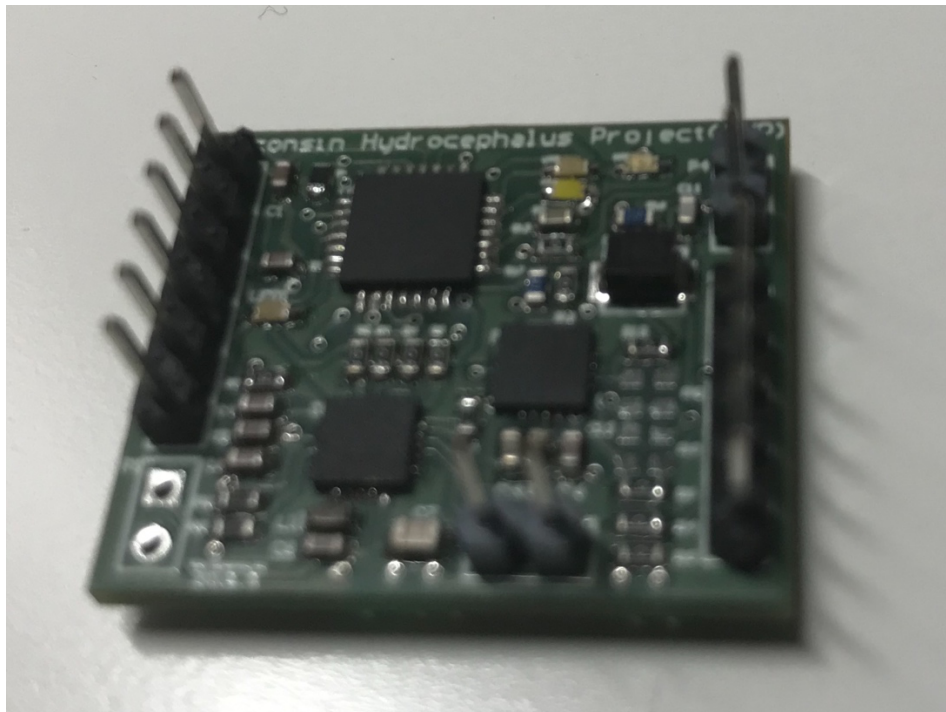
Final device integrating the sensor reader circuit, valve driver circuit and microcontroller.
